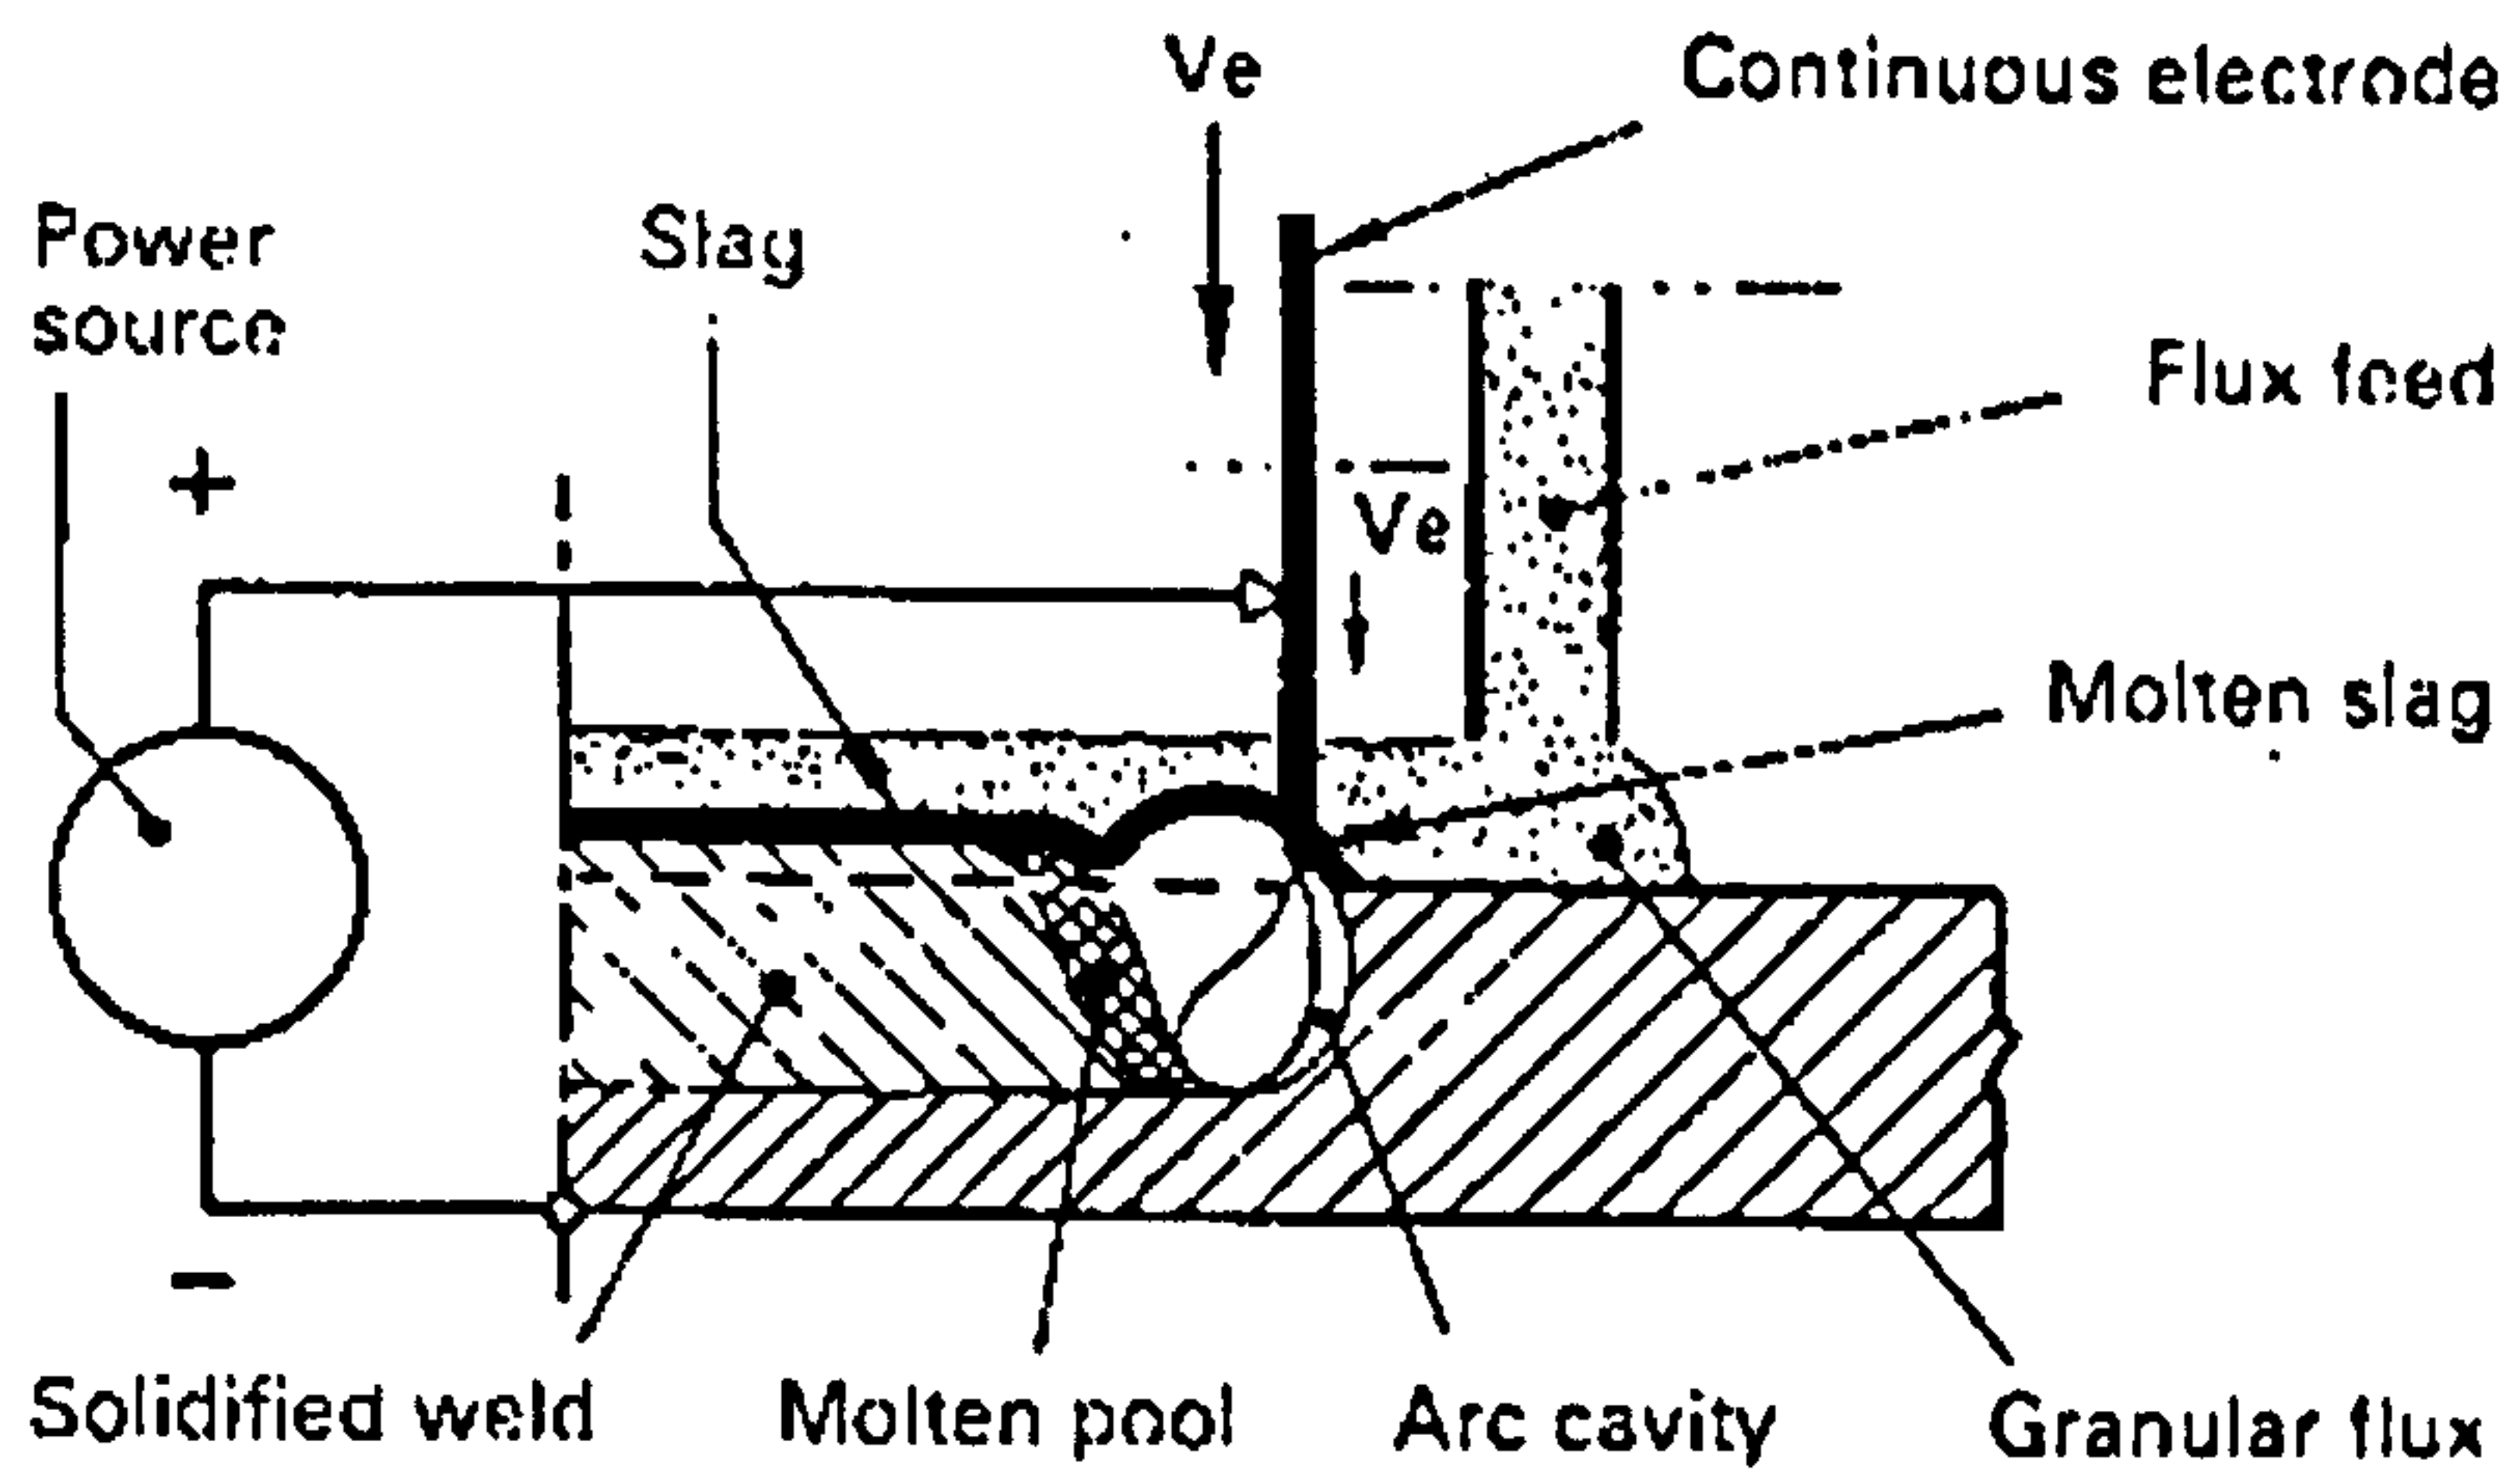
Submerged arc welding (after ref. 113)
